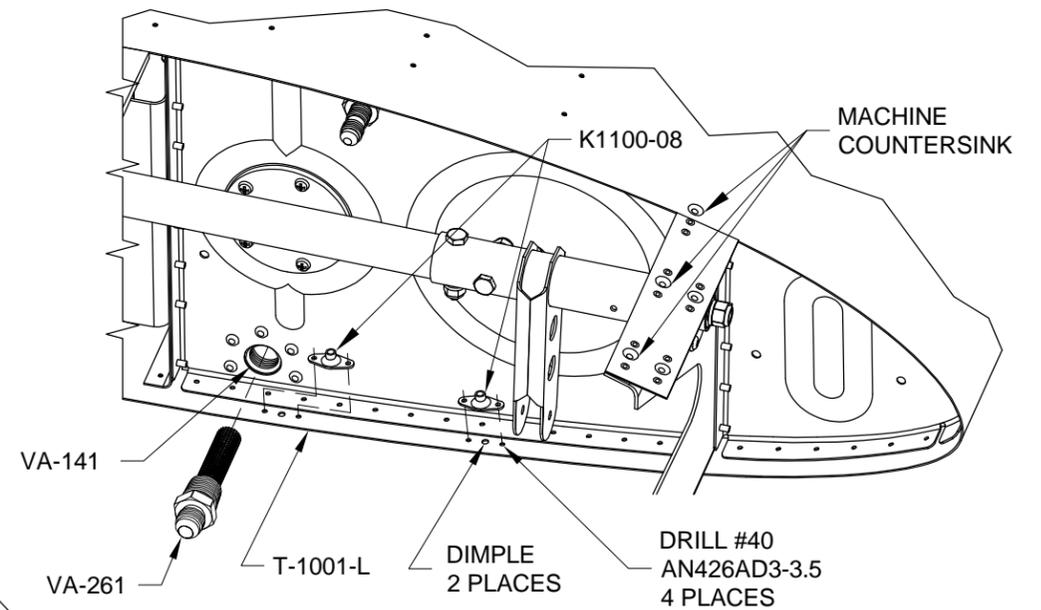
ATTACHING TANK SKIN NUTPLATES
